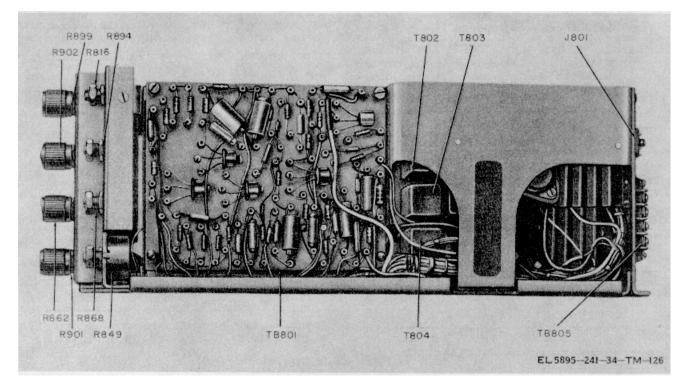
Amplifier Assembly AM-2827/FSW-8, right side view, parts location.
